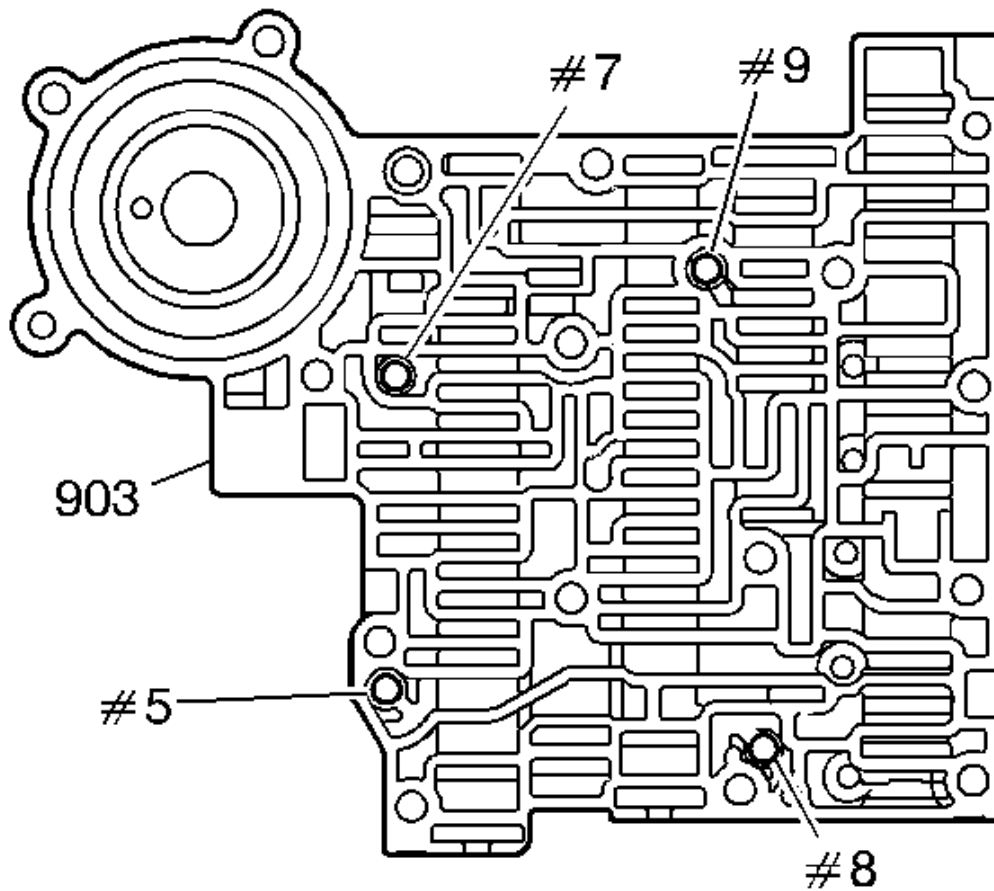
View Of Checkball Cavities In Lower Control Valve Body
